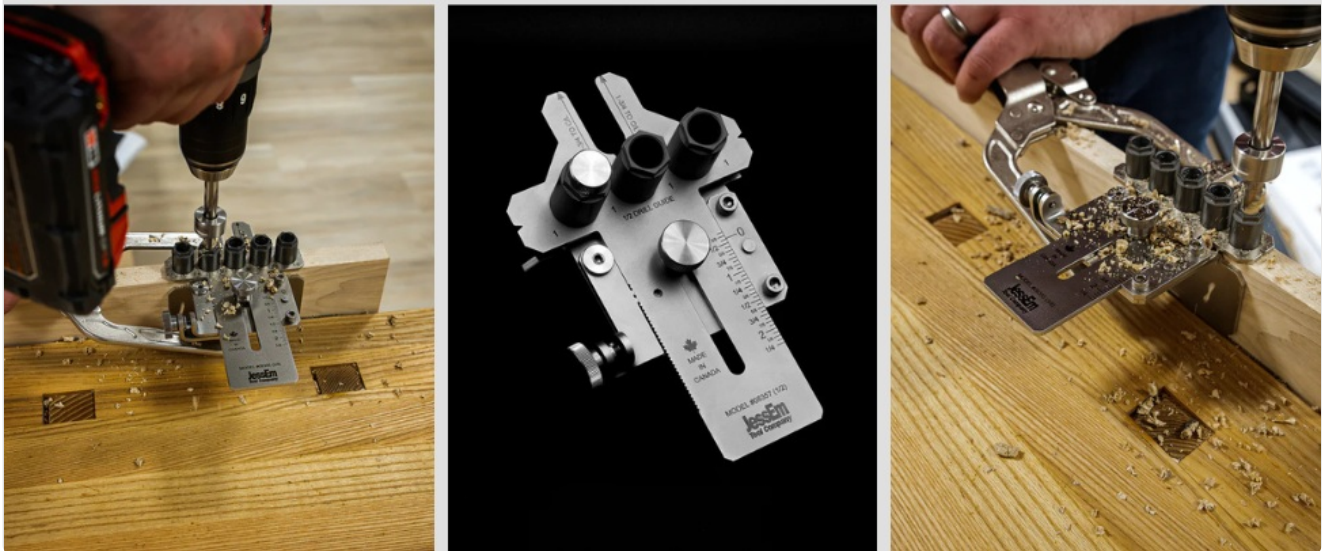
The JessEm Dowelling Jig clamped to a workpiece during drilling, illustrating proper setup and operation.
